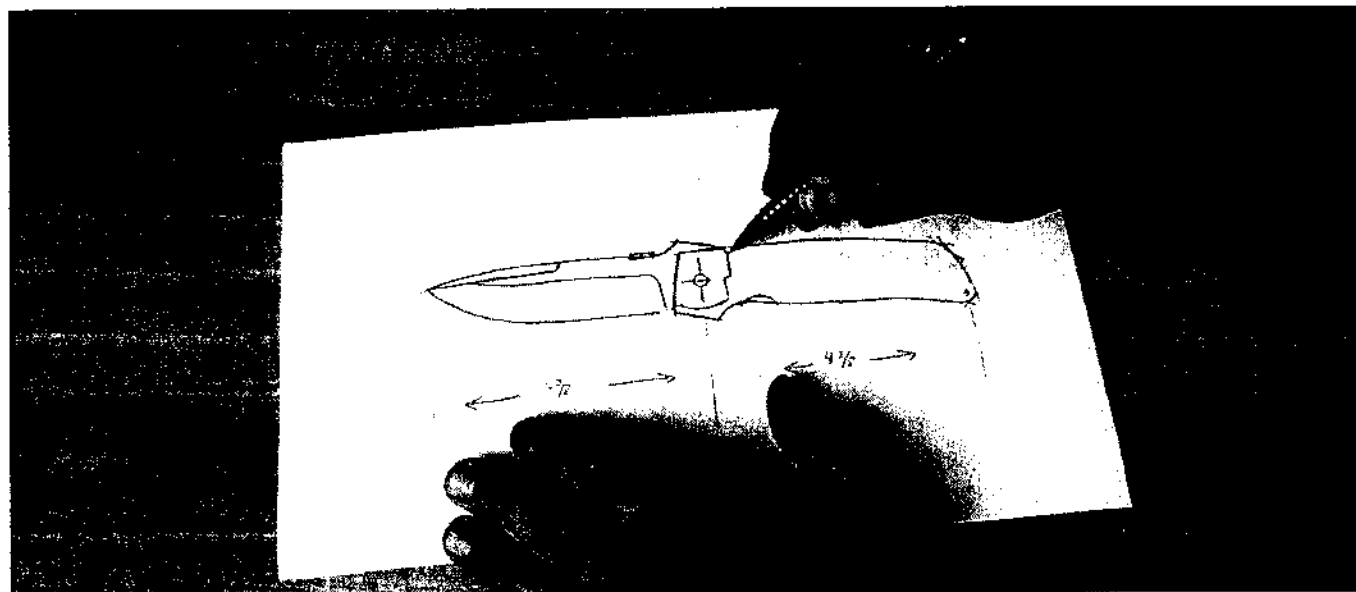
Sketch in the blade tang area so your drawing looks like an X-ray. See chapter 4 for details on designing the tang.
